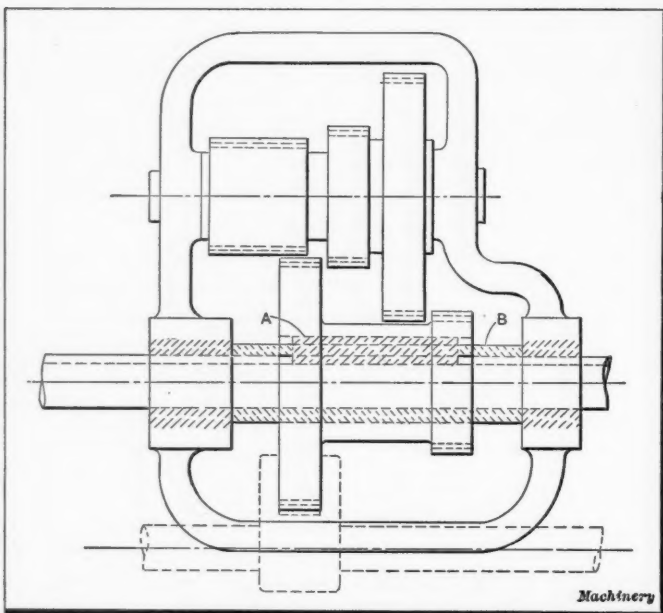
Method of Overcoming the Tendency of the Gears in the Gear-box to disengage
